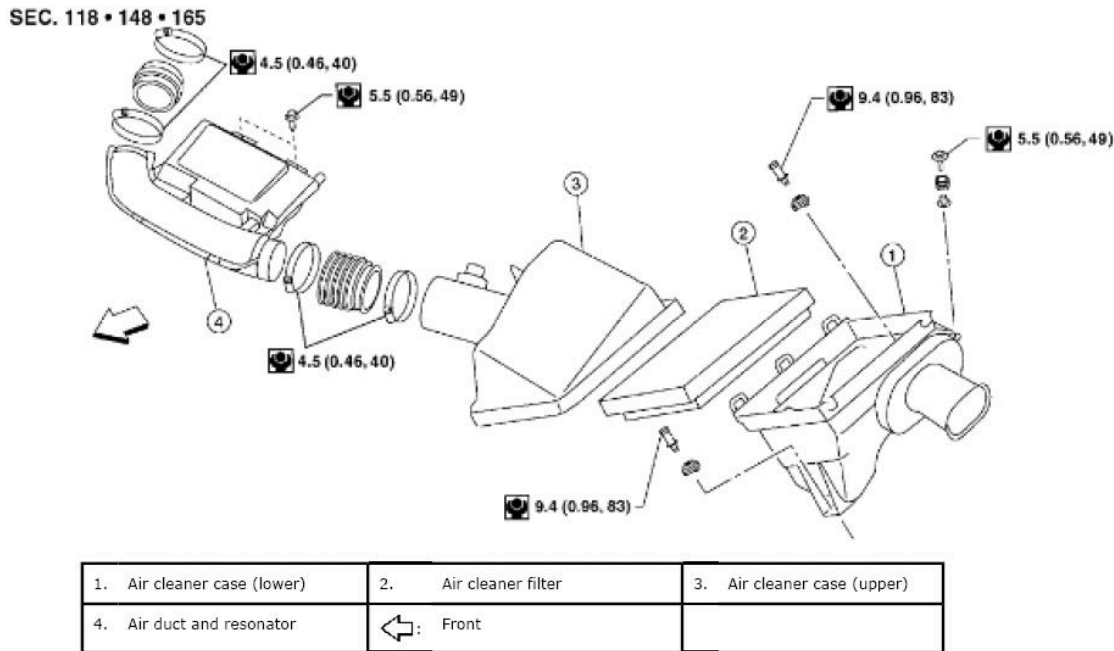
Exploded View Of Air Cleaner (VQ40DE)
